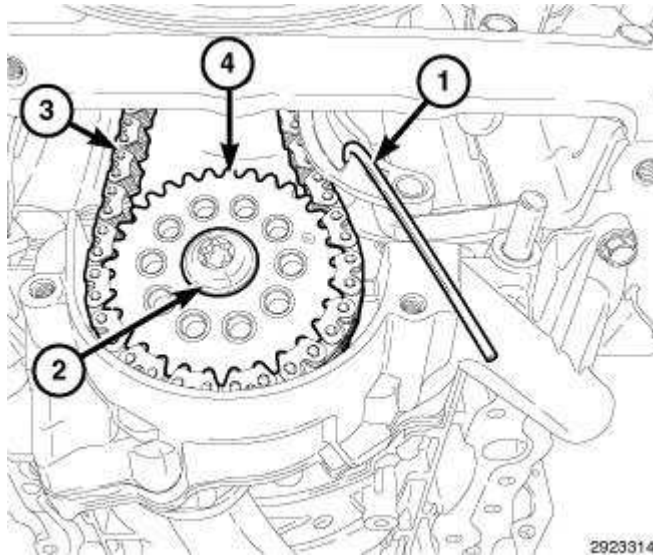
Retaining Pin, Retaining Bolt, Oil Pump Chain & Sprocket
